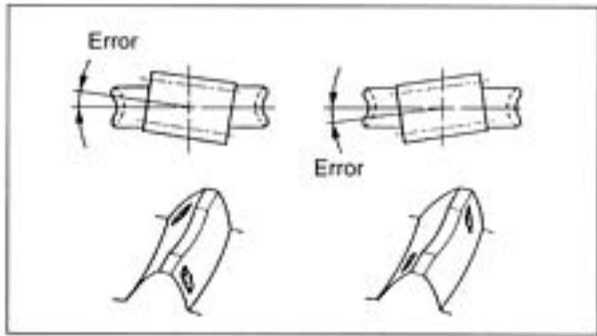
Poor Contact Due to Shaft Angle Error
